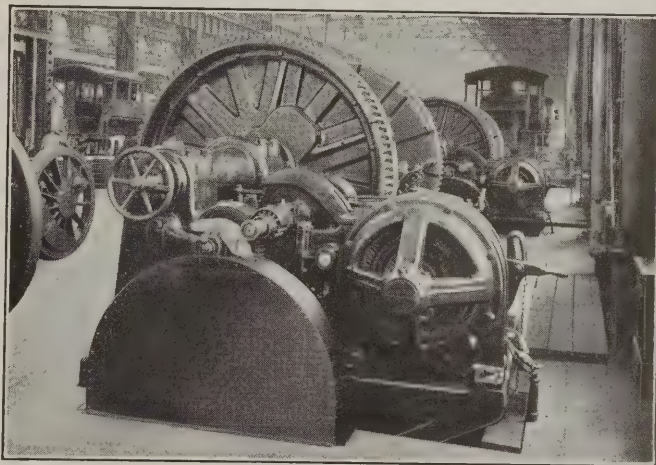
Wheel Lathe Driven By 75 Hp. Wound Rotor Alternating Current Motor
